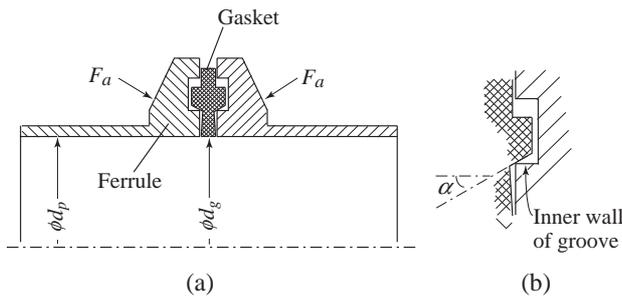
The SUSDETOP[®] metal gasket. (a) A schematic view of a pipe joint assembled with two ferrules (F_a : assembly force). (b) An enlarged view of the seal area.
